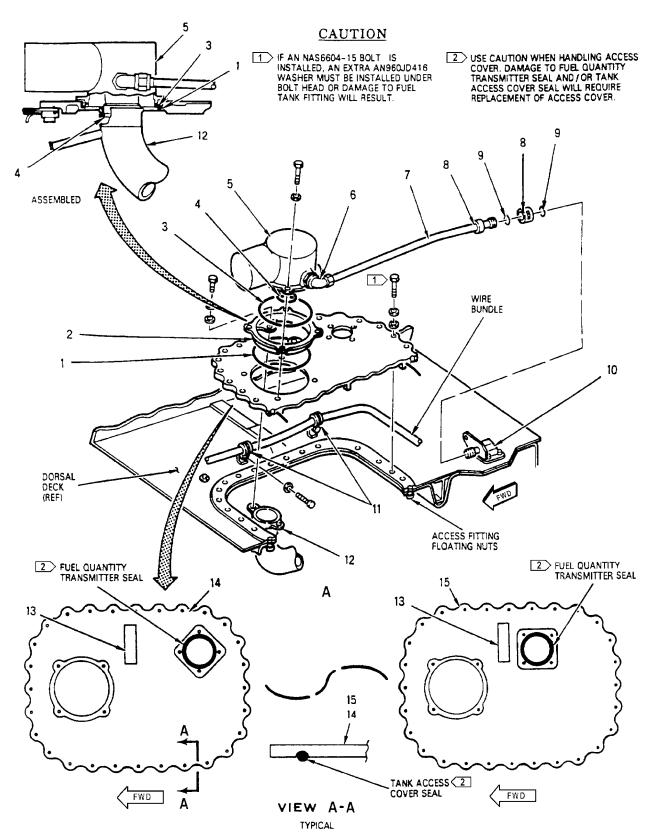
No. 3 Fuel Tank Access Cover (Sheet 2)
